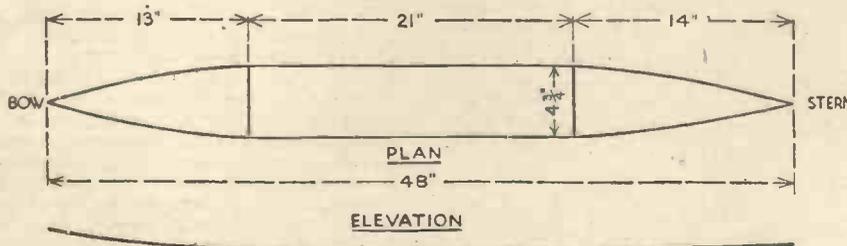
A plan and elevation of the sheer of the speedboat shown above
